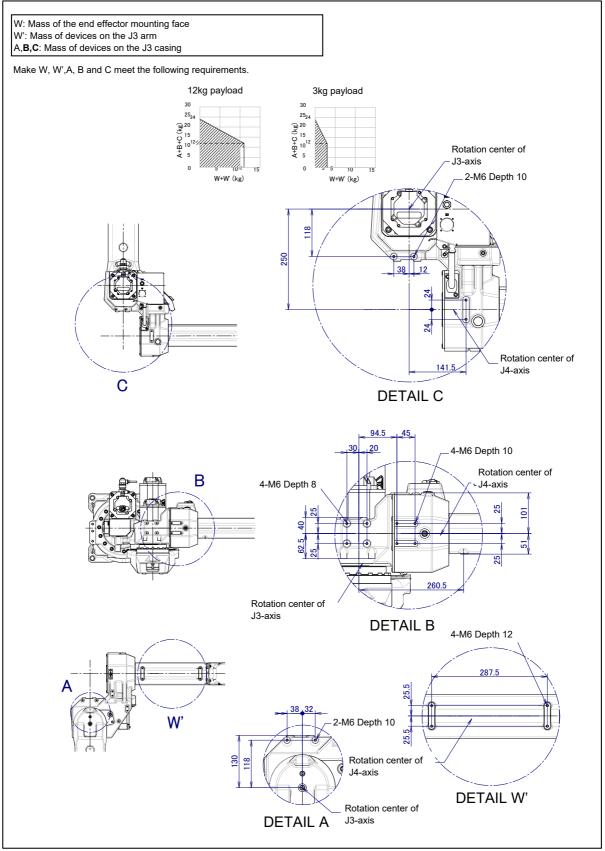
(c) Equipment mounting faces and load limitation (ARC Mate 120*i*C/12L, M-20*i*A/12L)
